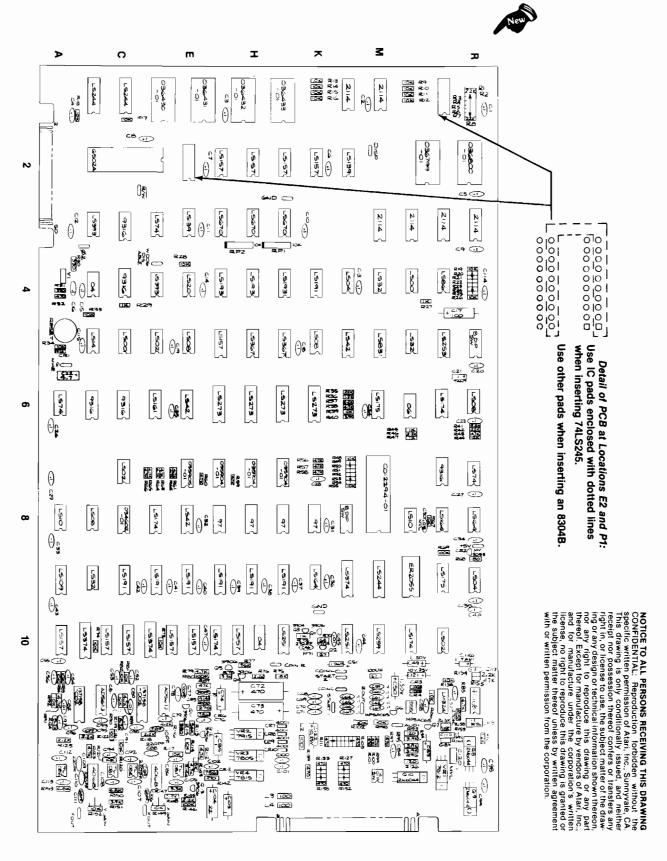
Asteroids Deluxe[™] Game PCB Assembly A036471-01 and -02 B
